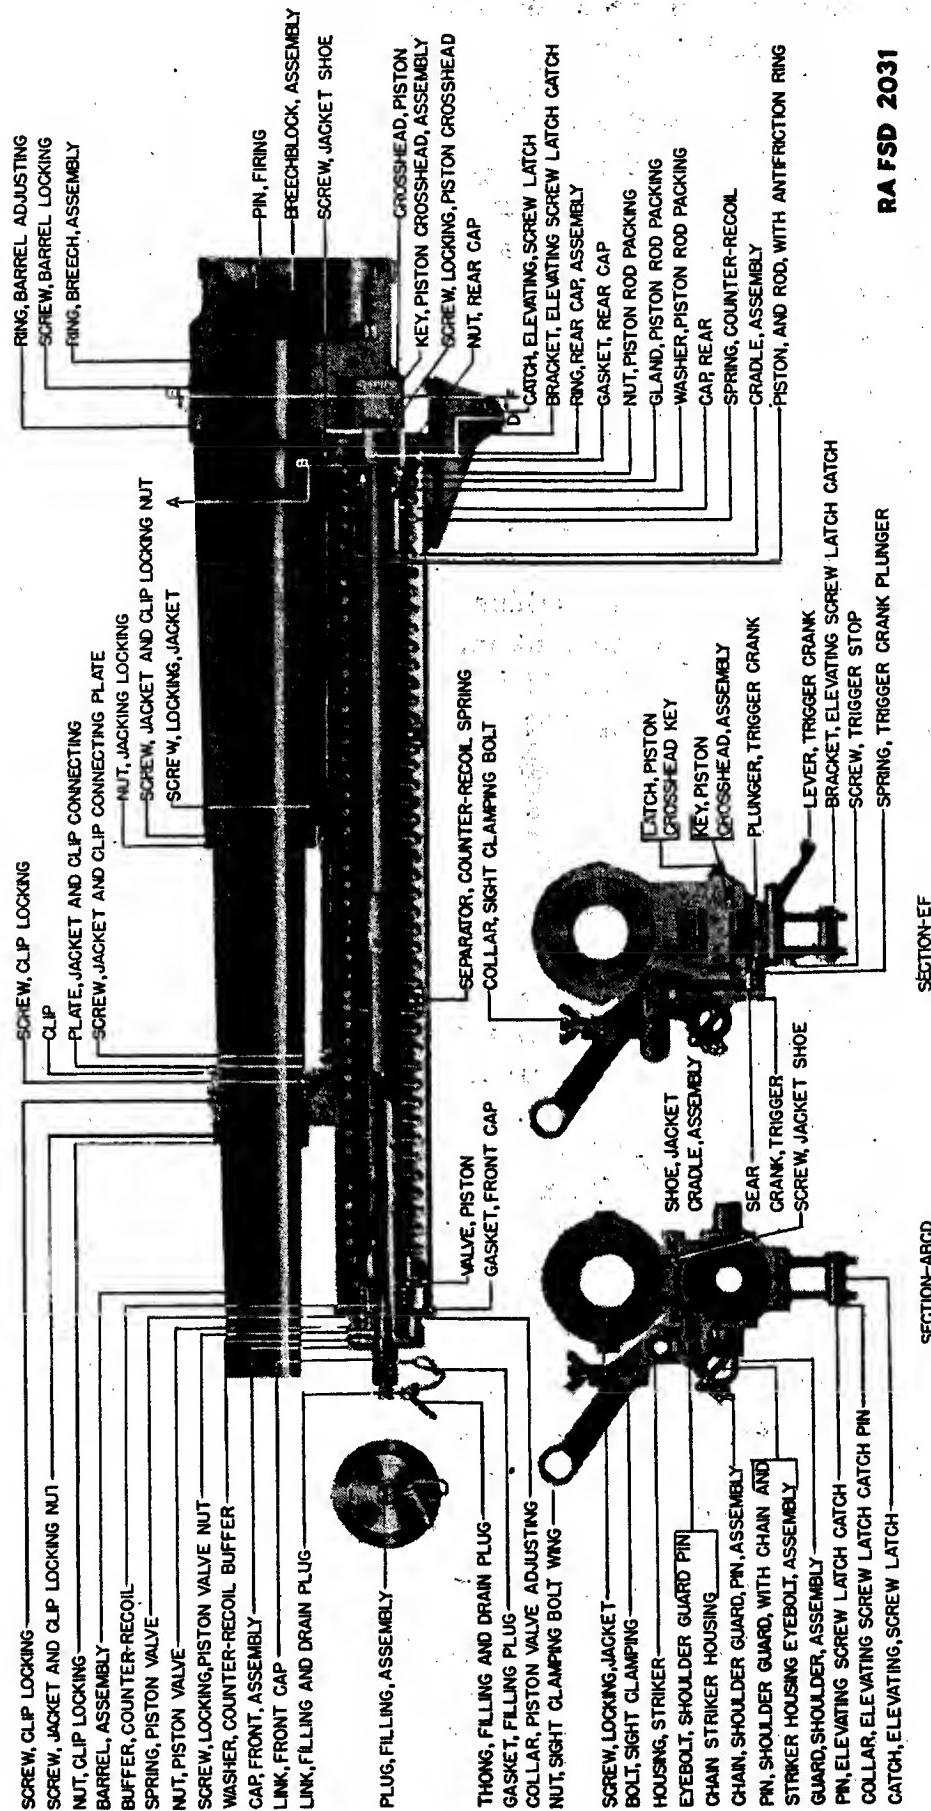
Sectional views of 37-mm gun and recoil mechanism
